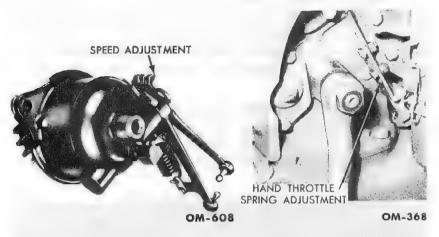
Governor Adjustment Fig. 52—Hand Throttle Spring Tension Adjustment
